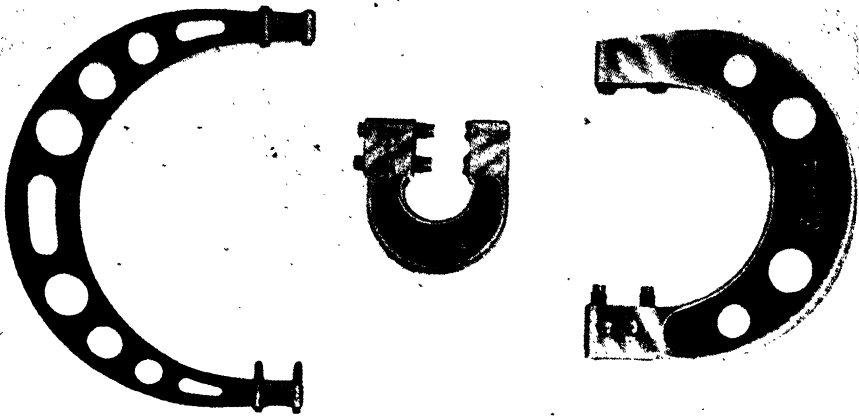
ADJUSTABLE EXTERNAL LIMIT GAUGE
